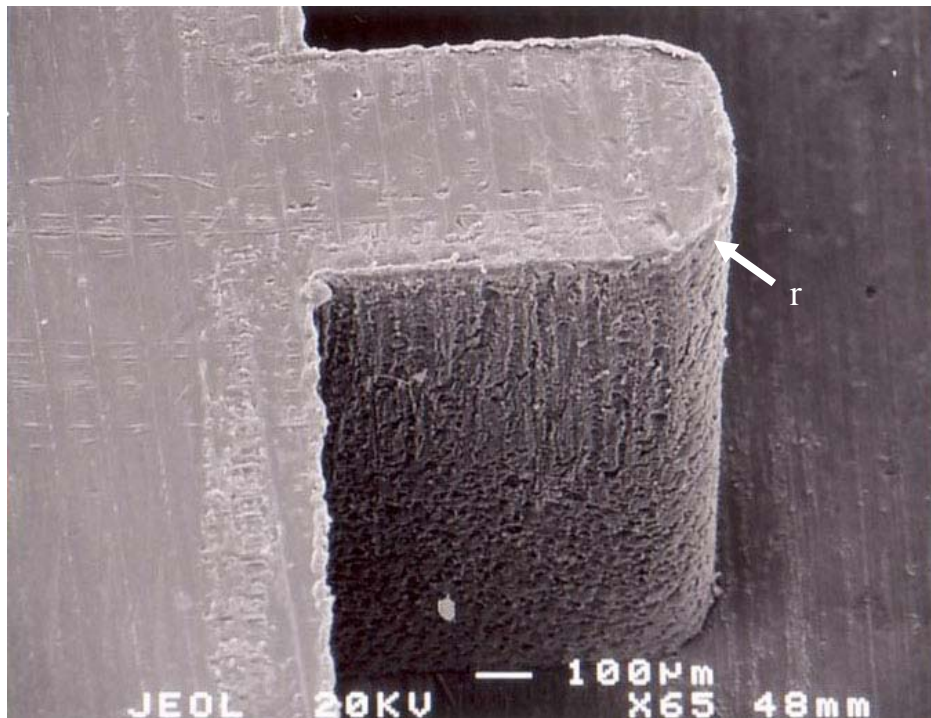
A close view of the round corners of an iris with 125  $\mu\text{m}$  radius,  $r$ , due to using the EDM machining to manufacture the mold.
